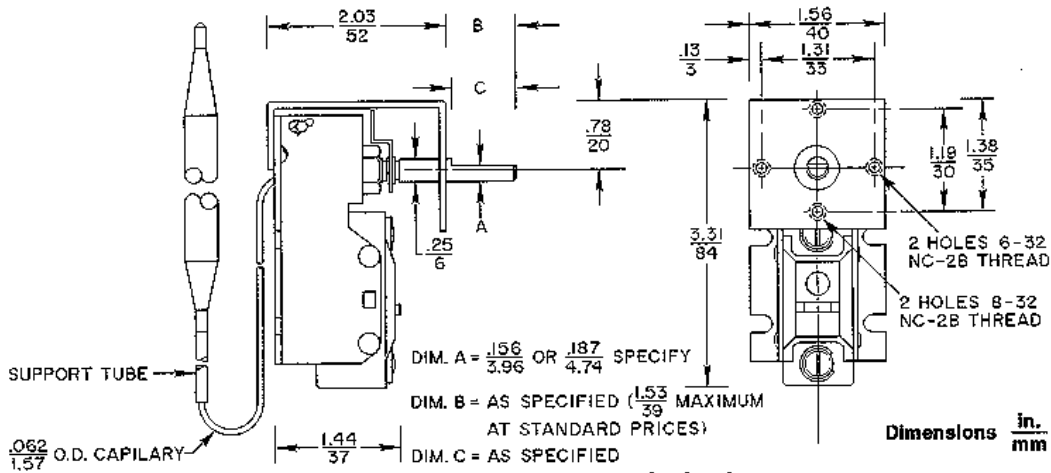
Center support, front mounting bracket, optional at extra cost.
